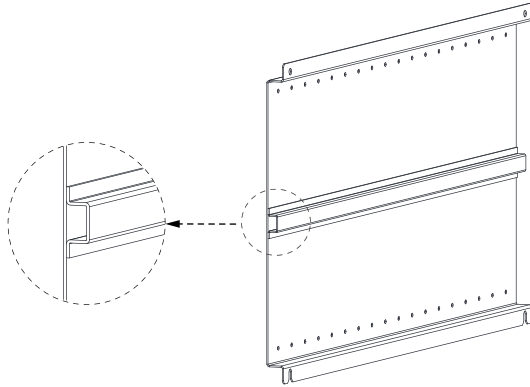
Welding a lateral reinforcing beam on the back of the backplate
